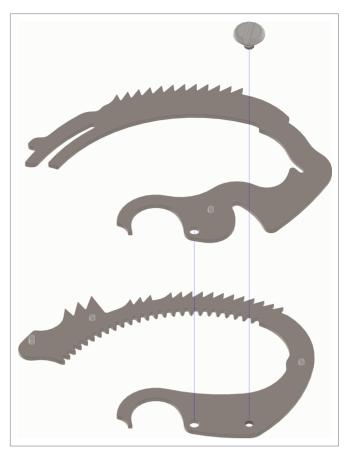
Exploded view of the Dual Strike-Rack System assembly.
